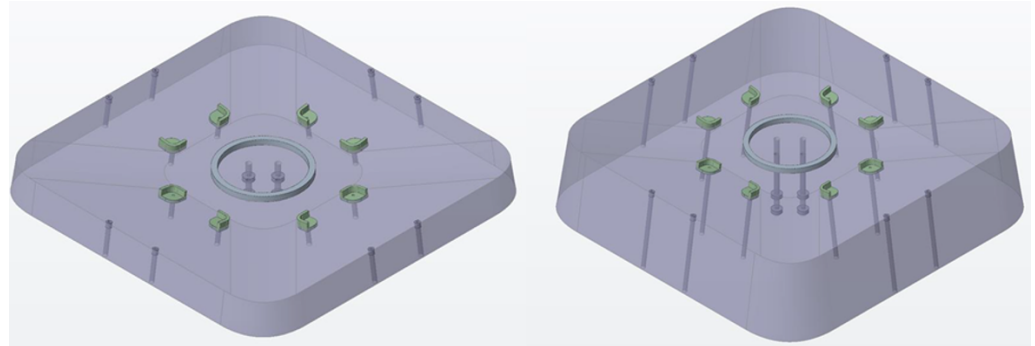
Baseline concept geometry for the fixture plate: (Left) design space envelope similar to CM; (Right) large envelope as machine space allows.
